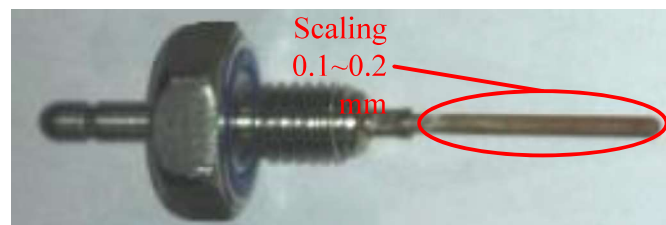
Deposit on grading electrodes at cathode side of valve assembly of rectifier station
